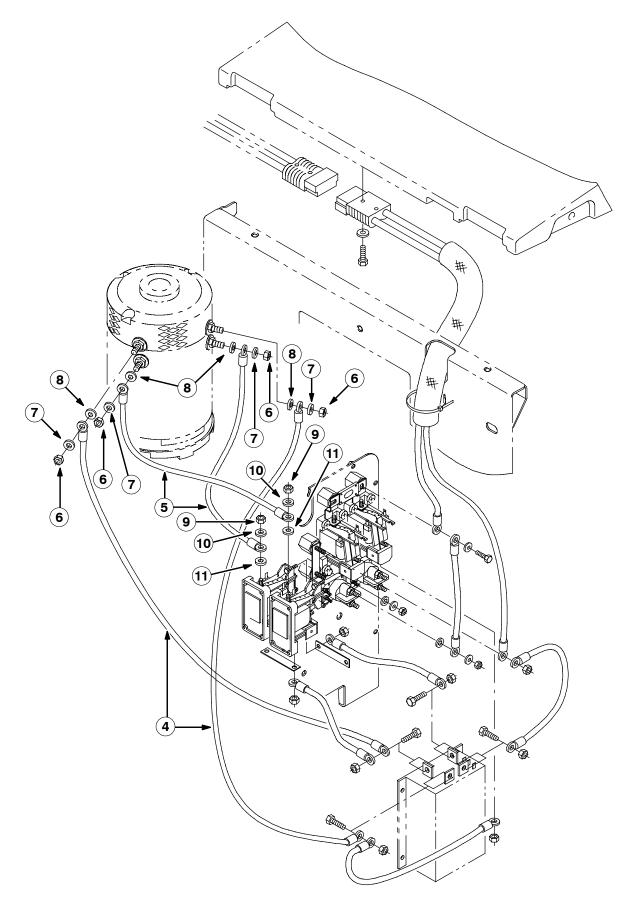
New Cable And Hardware Installation, Propel Motor (Refer to FIG. 3 for cable routing)
